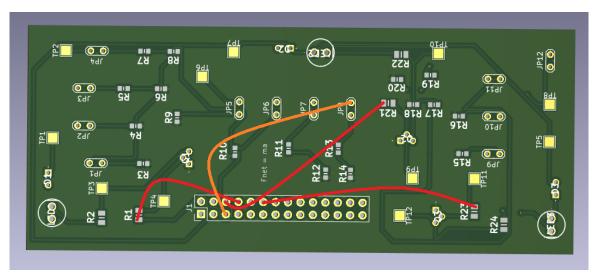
Wires Soldered onto PCB Board Represented by Solid Red and Orange Lines
